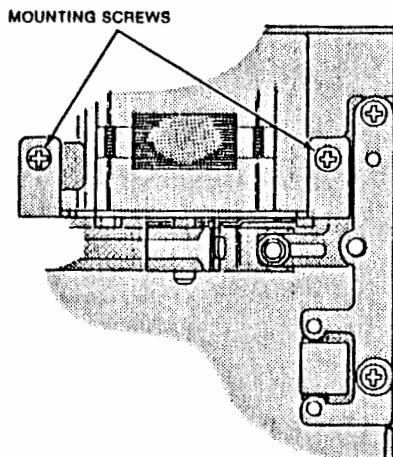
STEPPER MOTOR MOUNTING SCREWS
